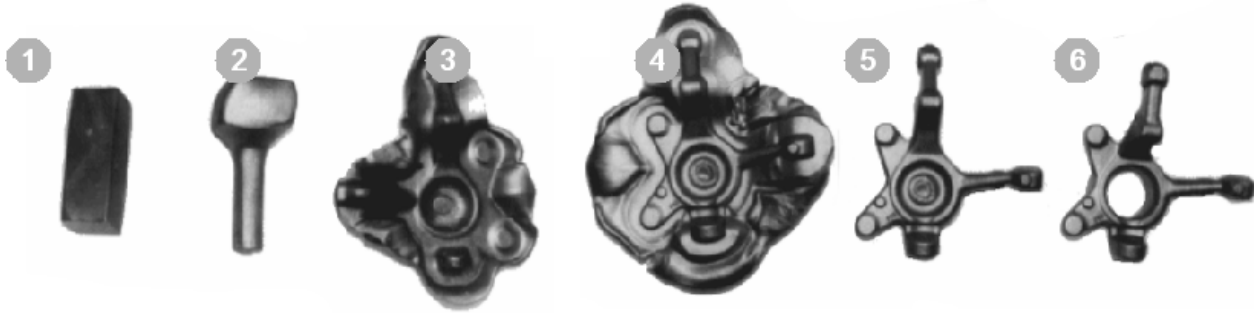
1) cutting 2) pre-bulging 3) pre-forging 4) final forging 5) chamfering 6) punching
